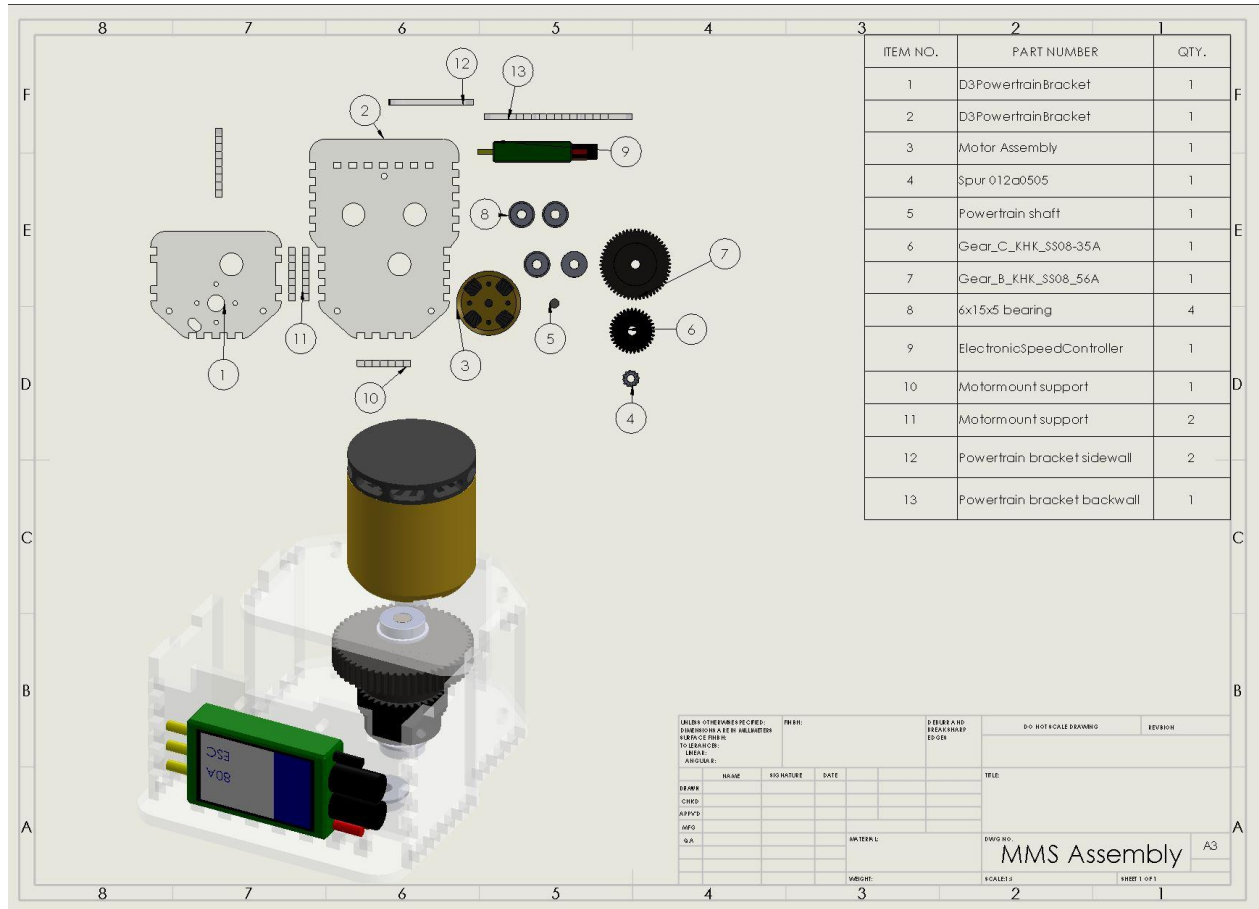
2D drawing, Exploded View & BOM of the MMS
